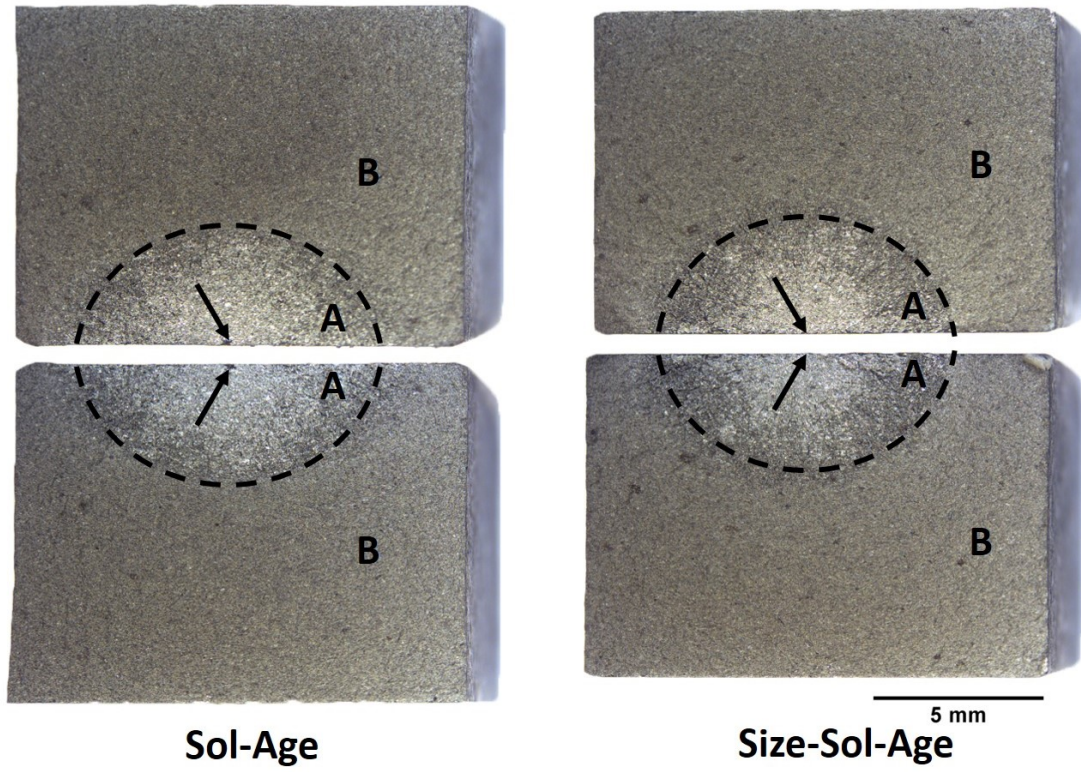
Macroscopic fatigue fractures of Sol-Age and Size-Sol-Age samples.
